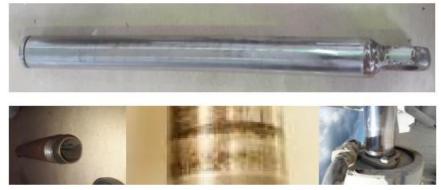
Appearance of worn surfaces of hydraulic system parts
